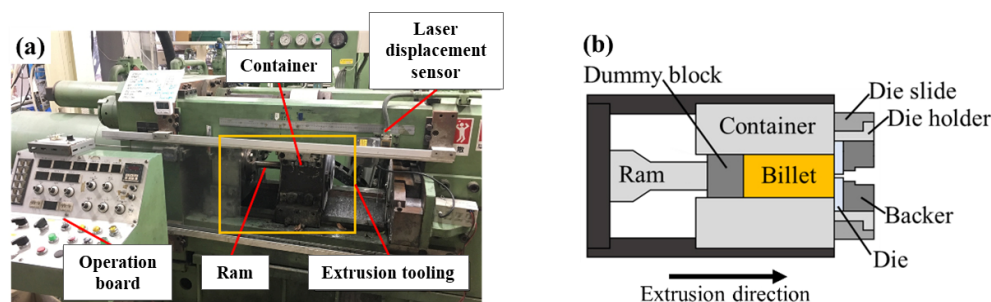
(a) 20,000 kN (200 ton) horizontal hydraulic oil press machine; (b) extrusion tooling.
